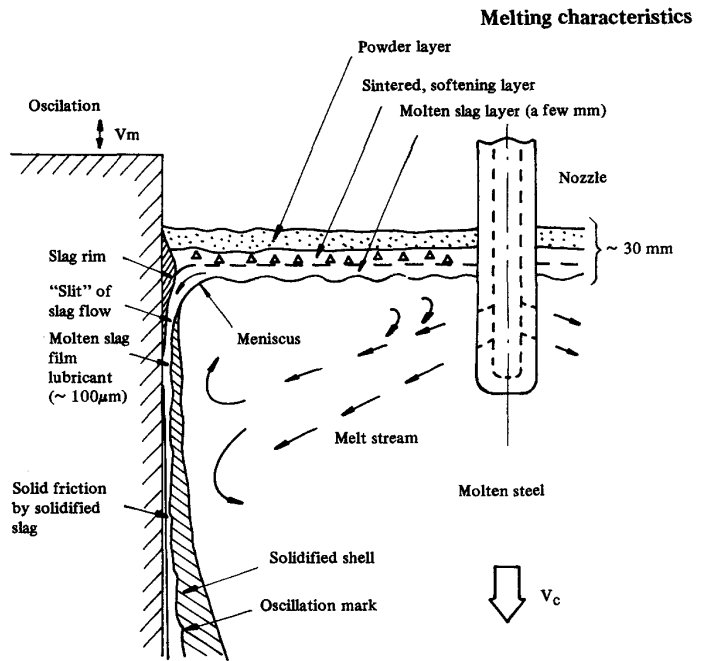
Schematic diagram of mold lubrication of slab casting¹³⁾
